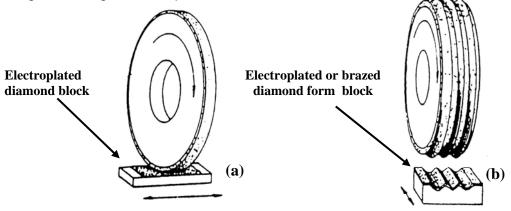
Diamond form truing block to true (a) a straight faced wheel (b) a form wheel
